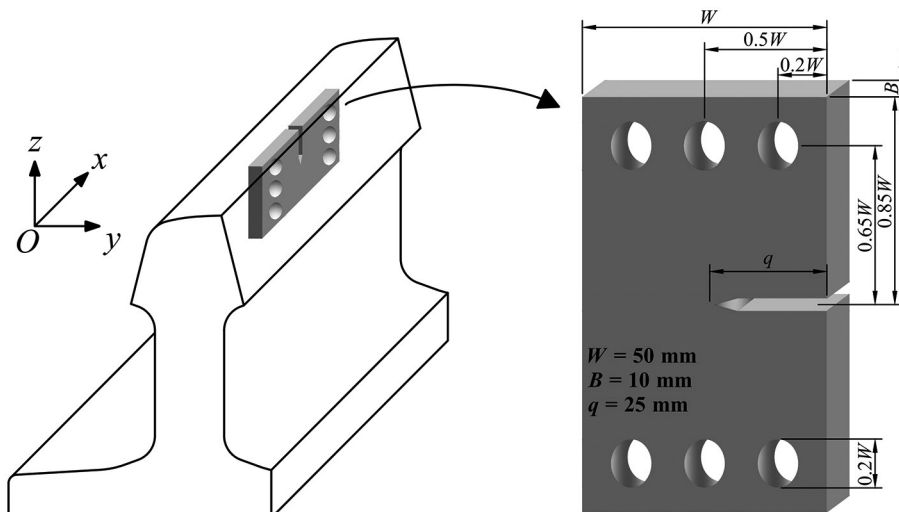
Sampling position and dimensions of compact tensile shear samples.
